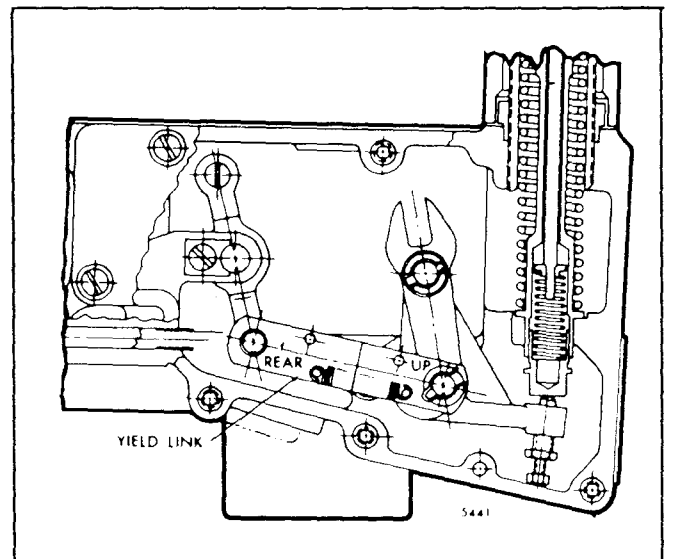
Throttle Delay Yield Link (8V Engine)
